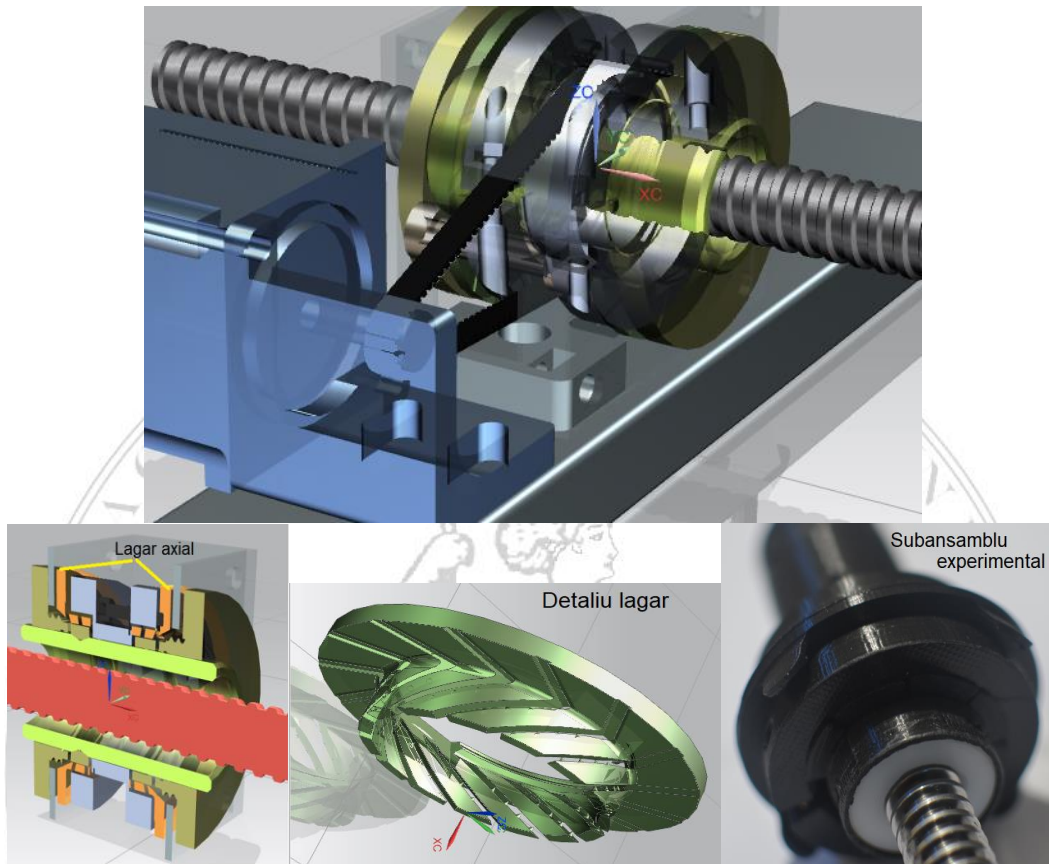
Drive system with movable nut for fast multi-axis movements.
